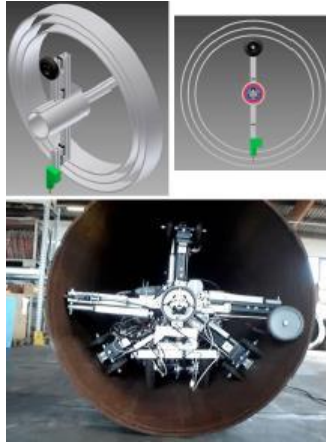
Isometric View and Front View of Triangular Structured Driving Mechanism In-Pipe Robot
